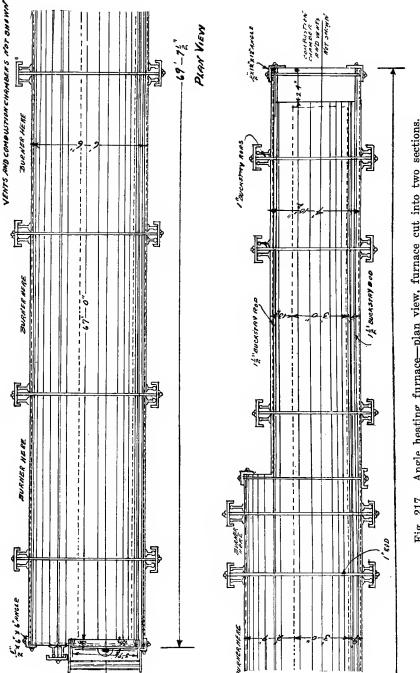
Angle heating furnace-plan view, furnace cut into two sections.
